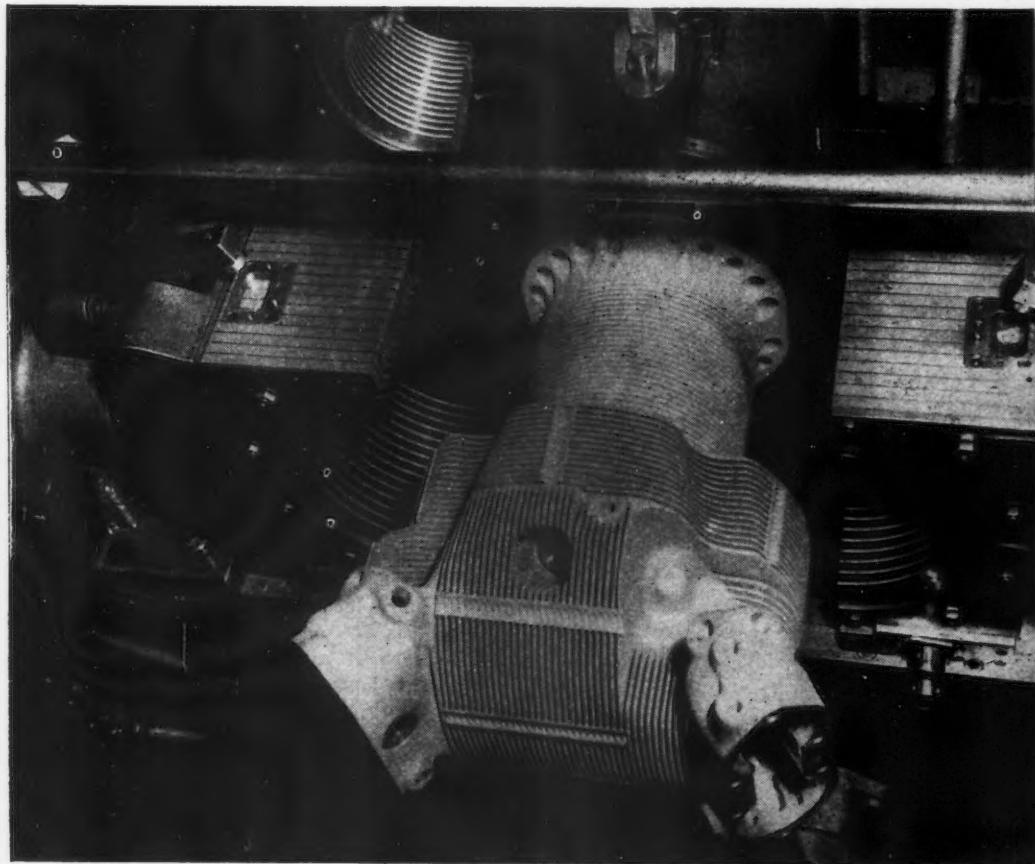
A closeup of the dual press used for inserting and staking the fins on a Cyclone cylinder barrel.
